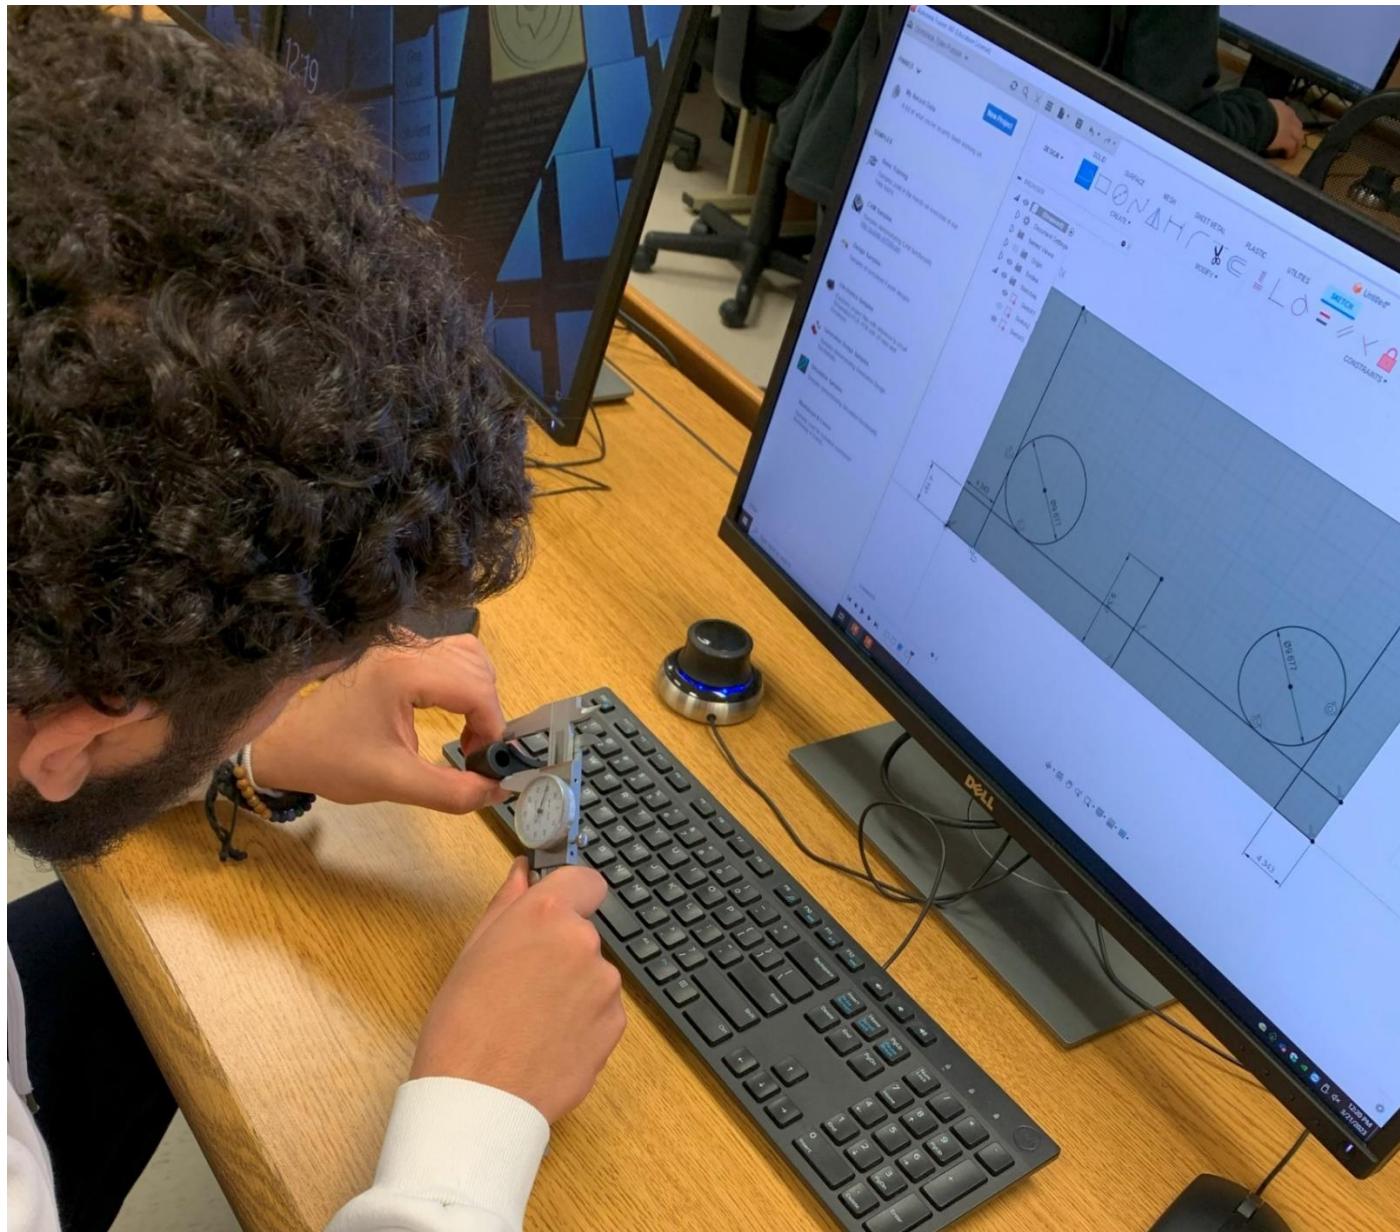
Creating a CAD model part of the bottom part of the clip to attach it to the arm of the Clip-on-Crutch
